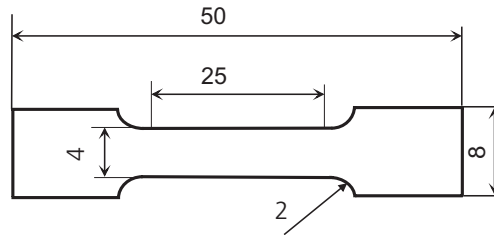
Dimensions of test-specimen # 53504 in [mm].
